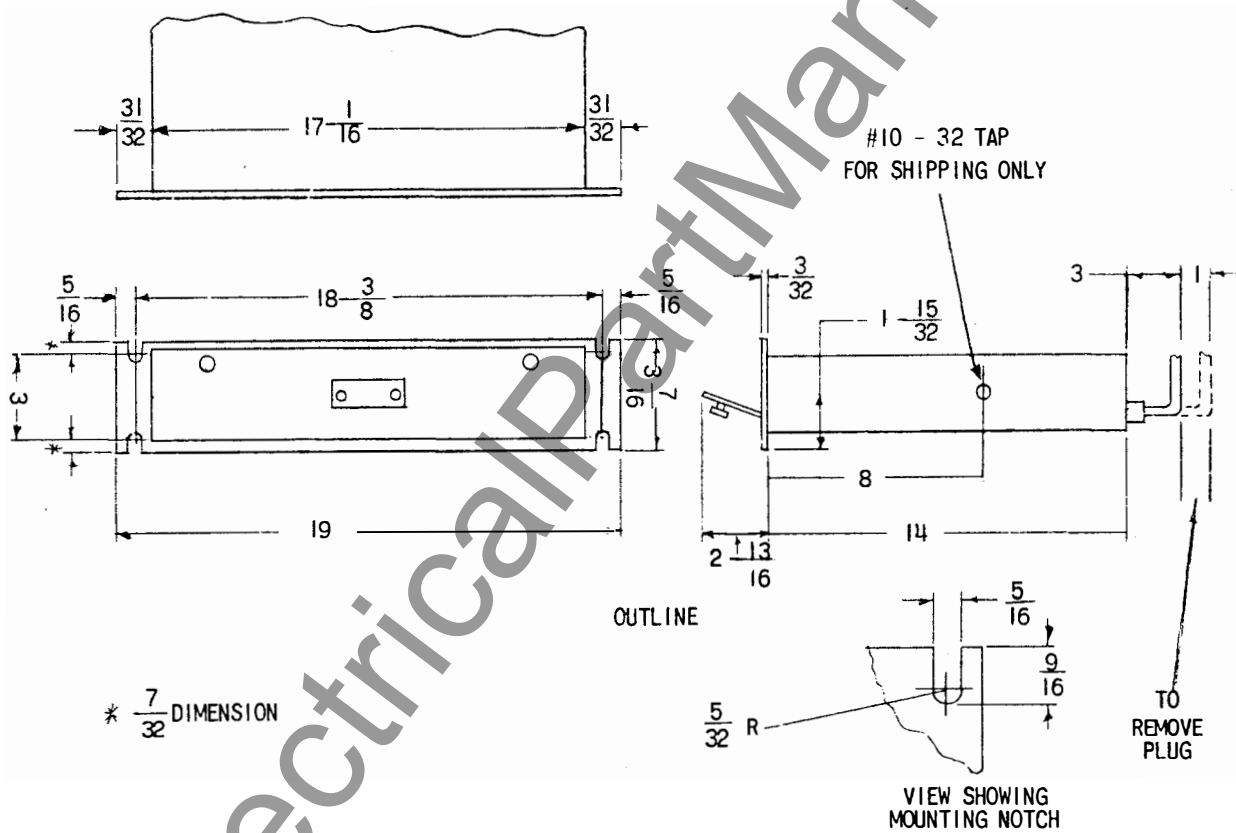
(0227A2036-0) Outline & Mounting Dimensions
